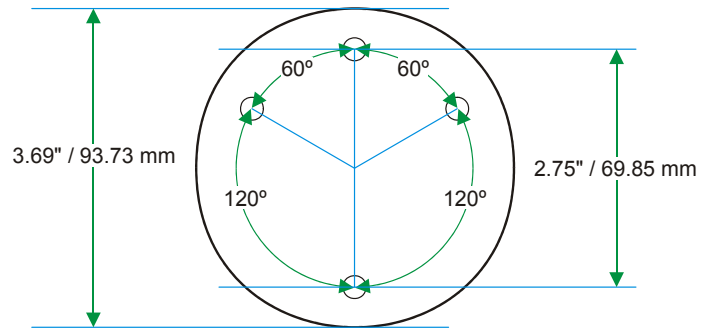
VX5 RAM Bracket - Mounting Dimensions (Not To Scale)
